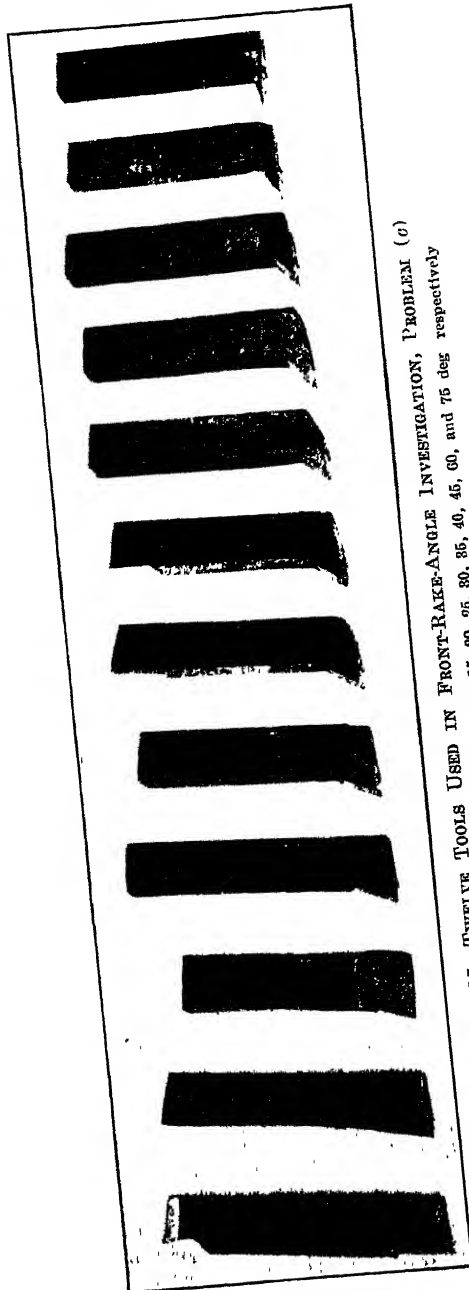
TWELVE TOOLS USED IN FRONT-RAKE-ANGLE INVESTIGATION, PROBLEM (a)
